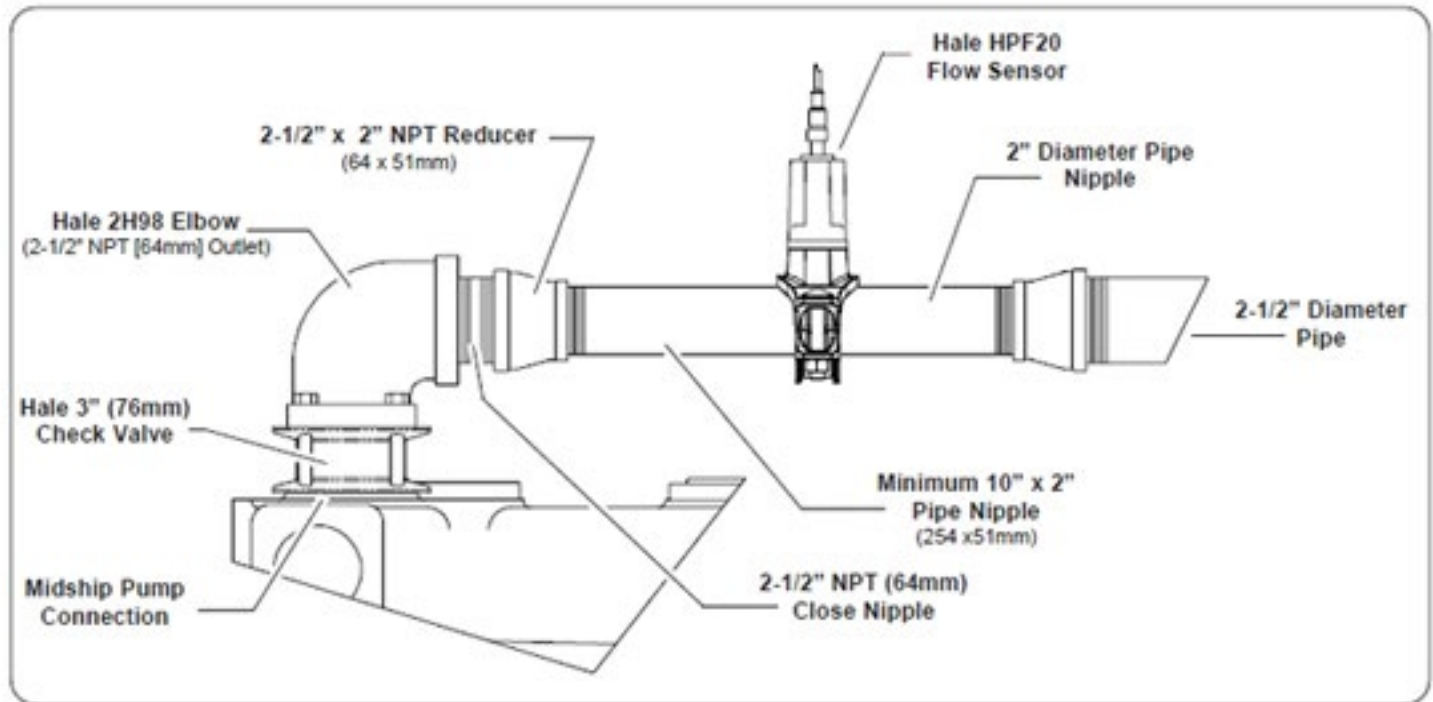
Typical Reduced Size Sensor Piping Arrangement
